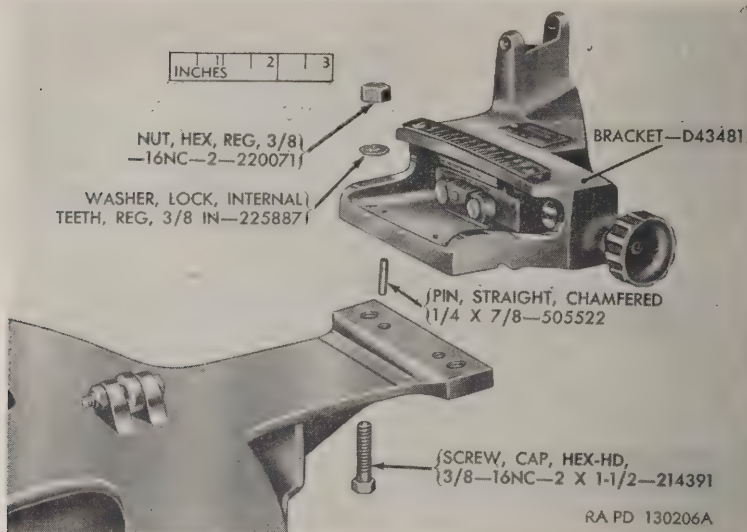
Removal of bracket from support—plotting board M5 or M5A2.
